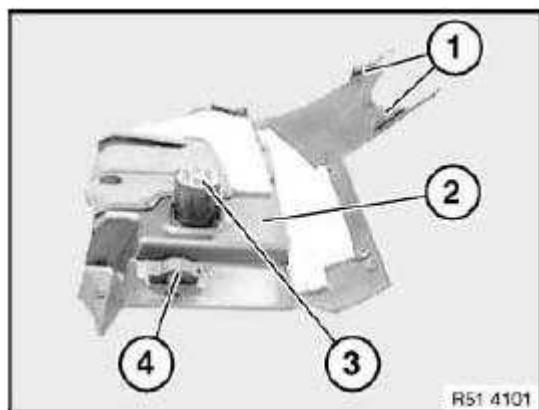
Tabs, Pedal Assembly And Footwell Light
